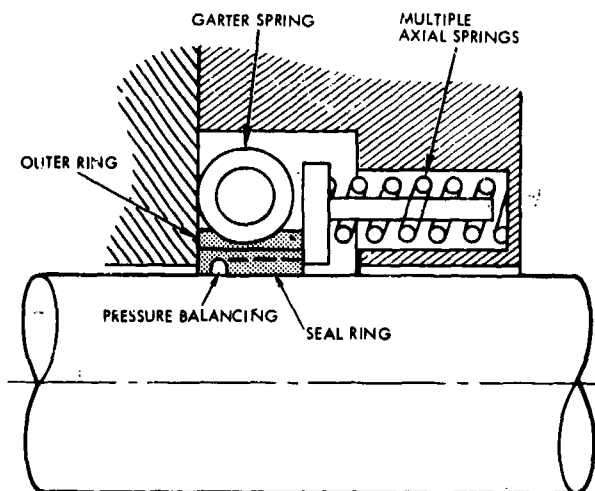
Two-Piece Rod Seal with Pressure Balancing and Spring Loading
